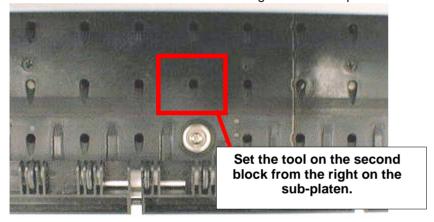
CR Cover Height Adjustment tool Setting Position
